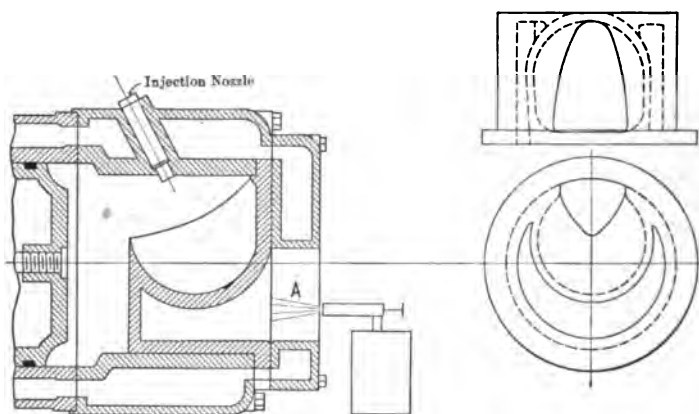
Buckeye Barrett oil engine combustion chamber.
